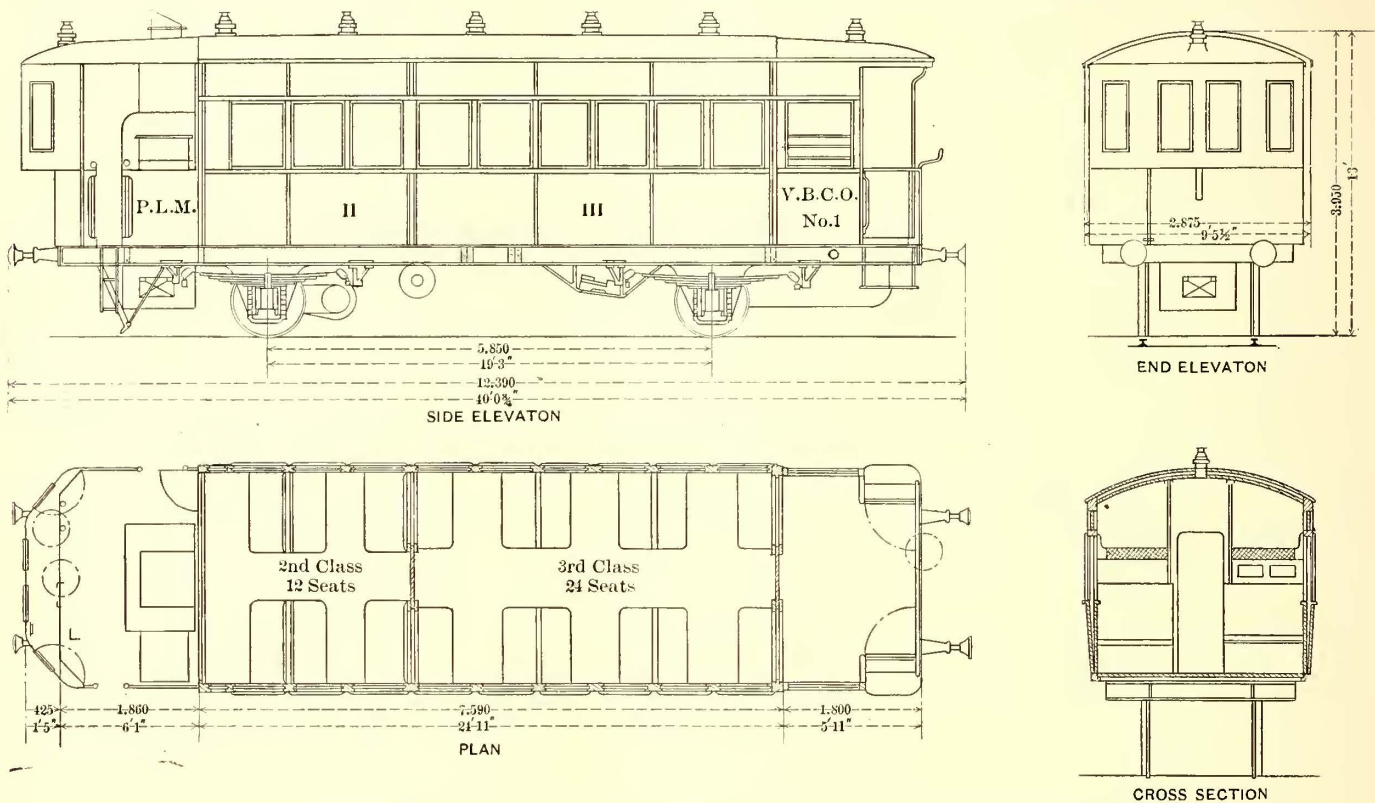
CONSTRUCTION DETAILS OF STEAM MOTOR CAR. PURREY SYSTEM
